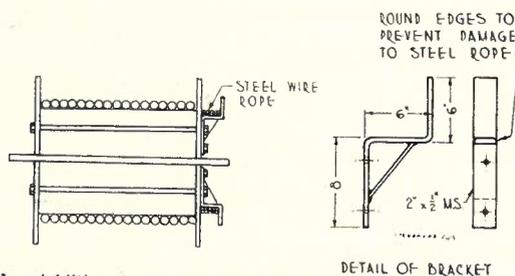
Additional fittings attached to cable drum for use when withdrawing cable.
